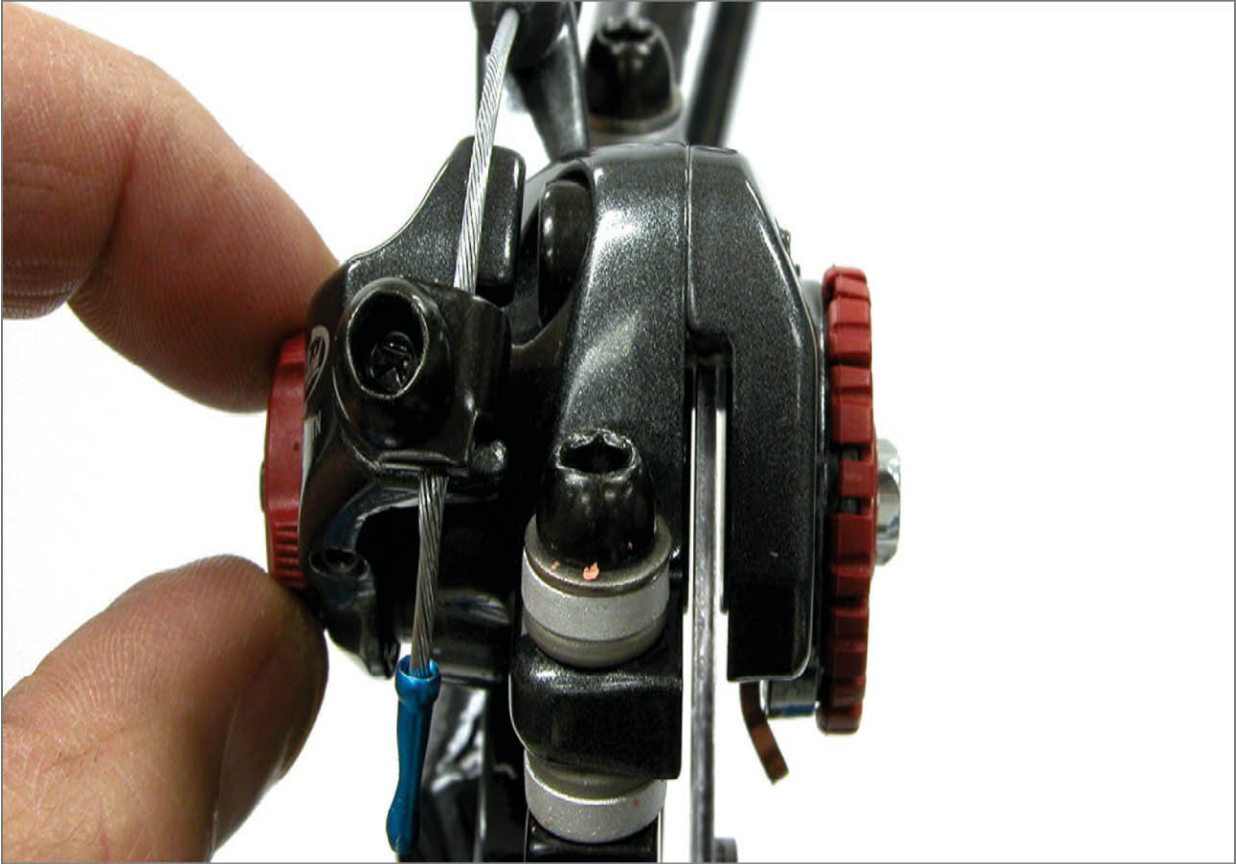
Adjust each knob so pads do not rub rotor
